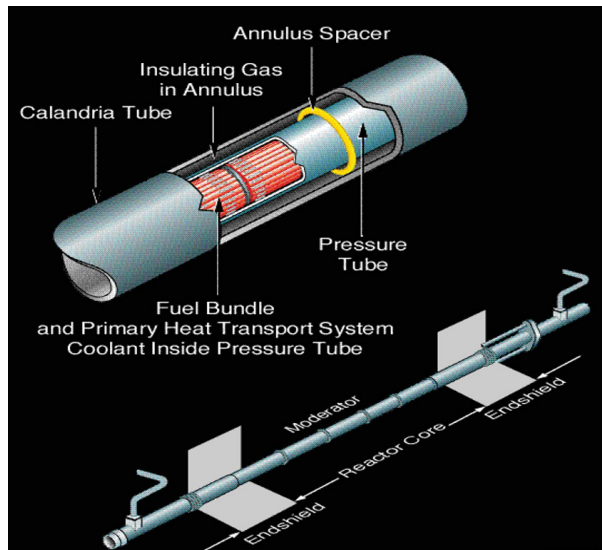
SECTION VIEW OF FUEL CHANNEL ASSEMBLY
